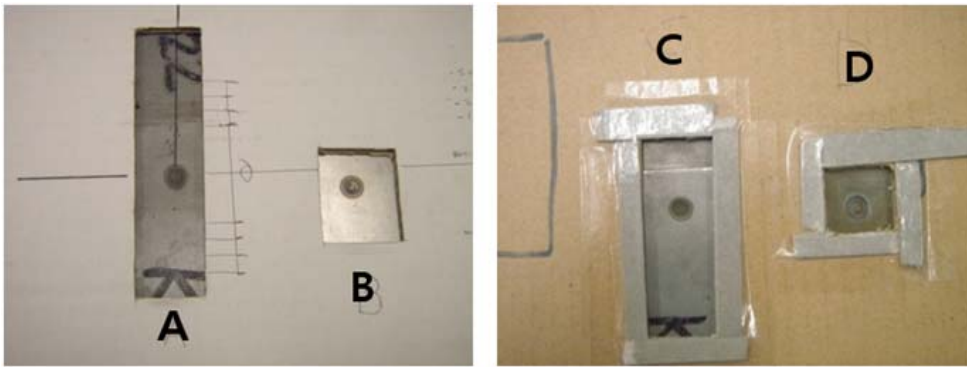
Spot welding specimen A,B,C,D
